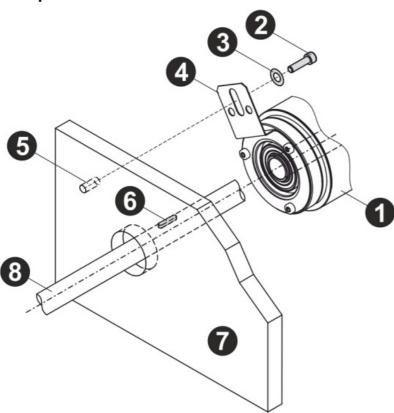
Mounting with torque holder (Spring metal sheet with one wing), principle illustration
